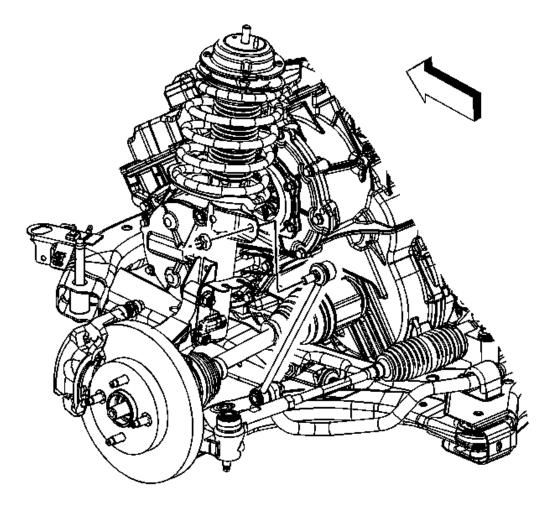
Steering Gear Outer Tie Rods Courtesy of GENERAL MOTORS CORP.
